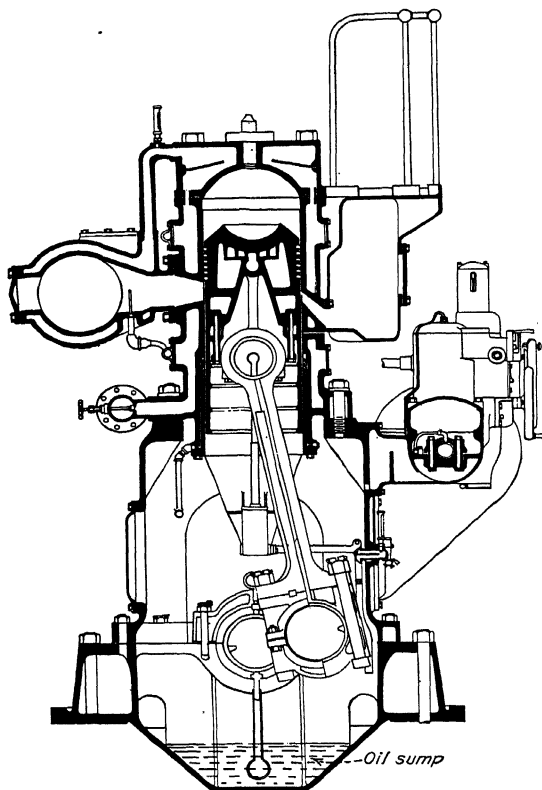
Transverse section of Diesel engine shown in Fig. 304. (Courtesy Socony-Vacuum Oil Co.)
